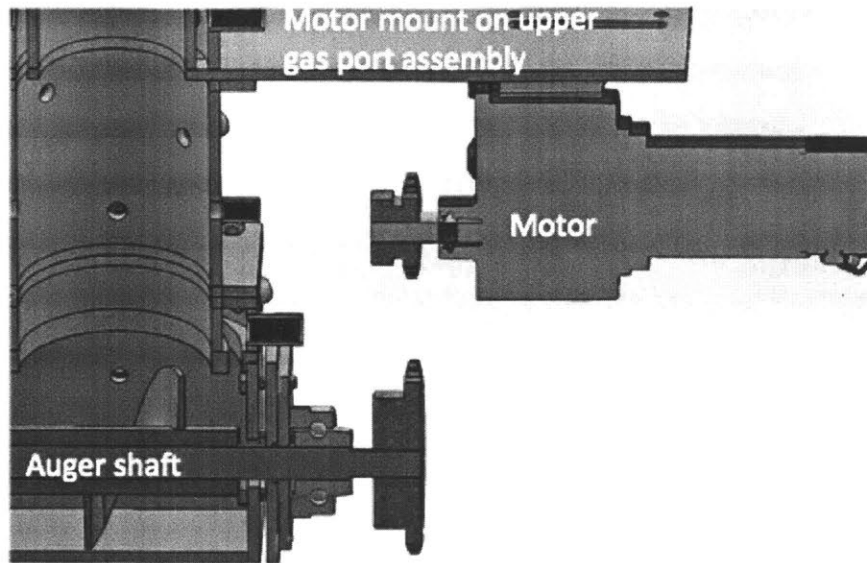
SolidWorks rendering of the motor drive. Not shown is the #50 chain connecting the motor sprocket to the auger shaft sprocket.
